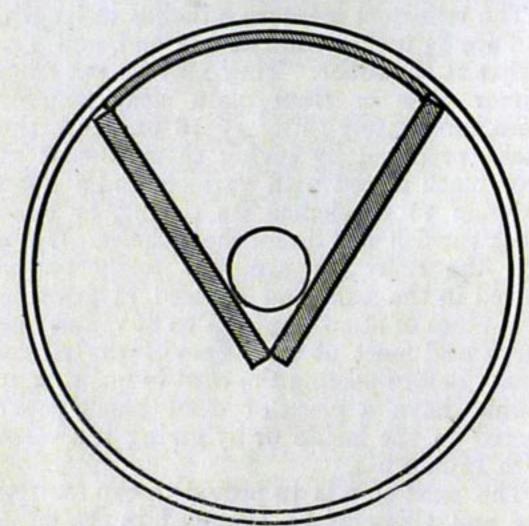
Plan of Tube at Eye End, with Cap Removed (full size).
